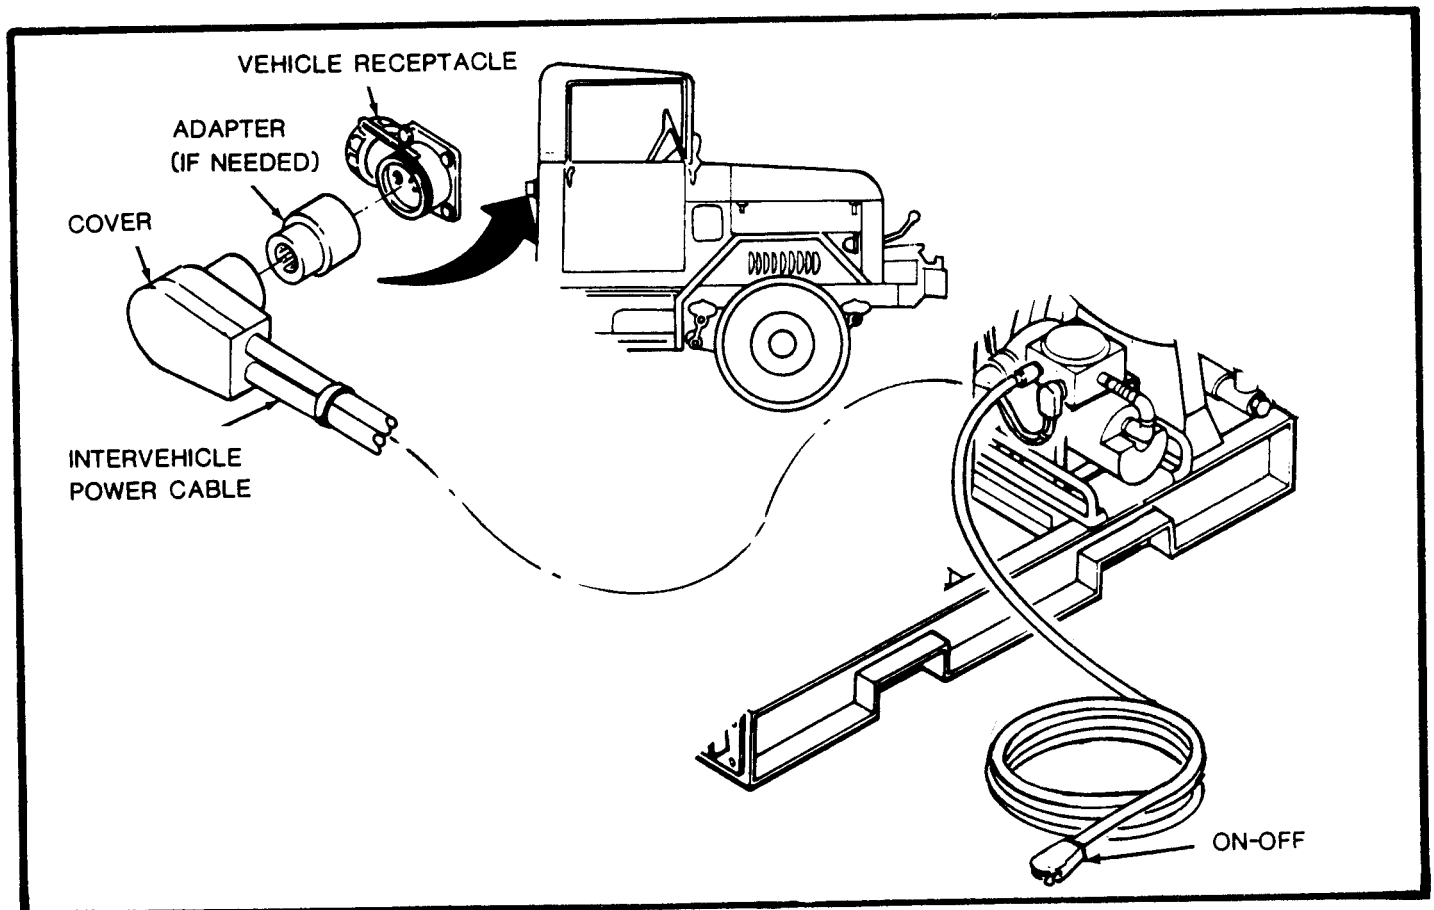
Electric Motor Driven Pumping Assembly.
